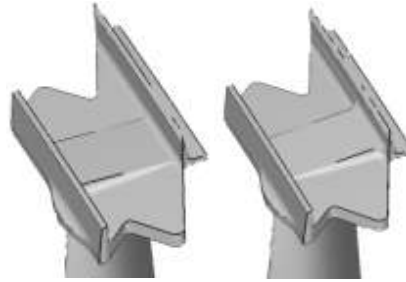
Final blades to be implemented for joint axial/clearance measurement
